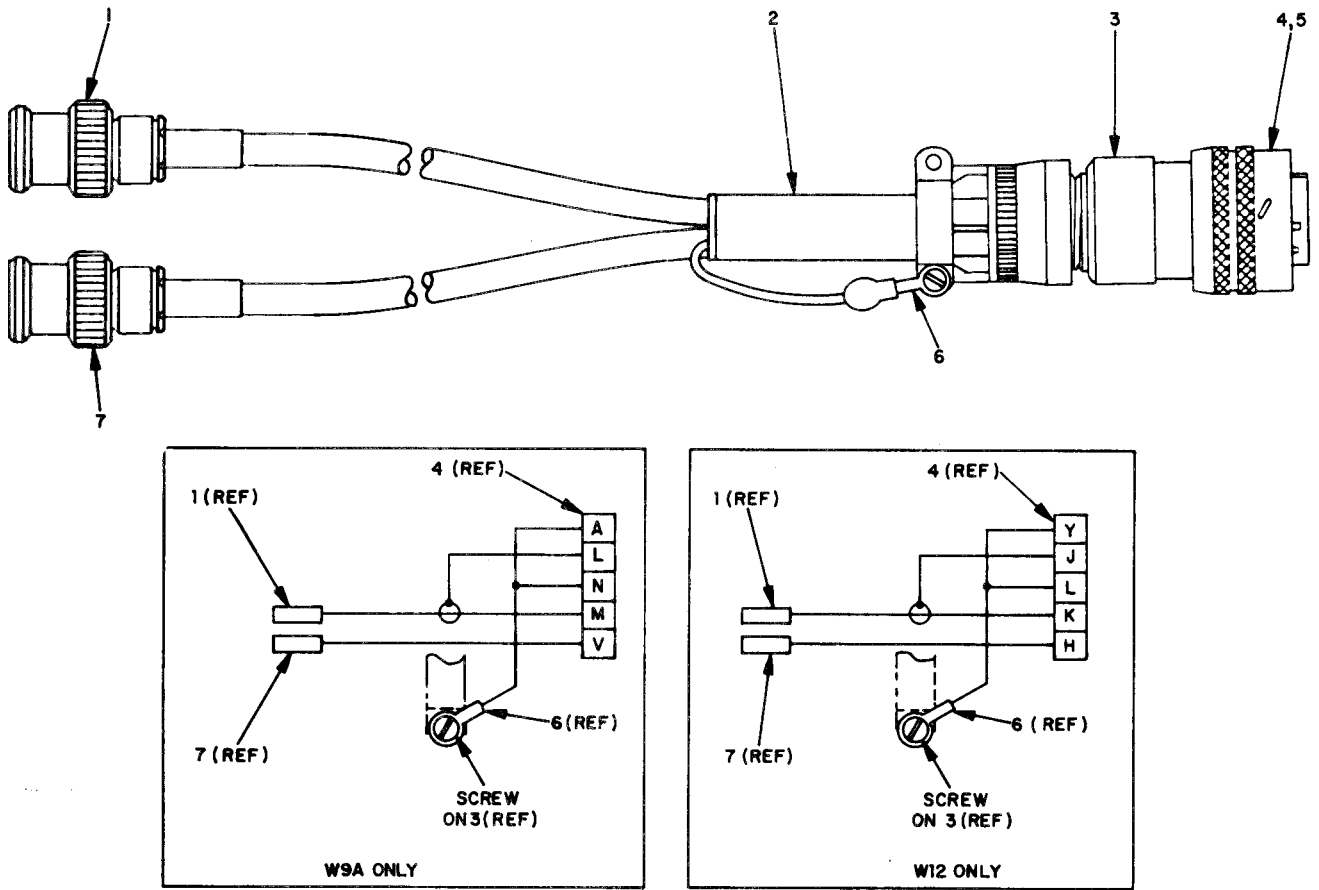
Adapter cable assembly W9A (467-115-001) and W12 (467-120-001)
